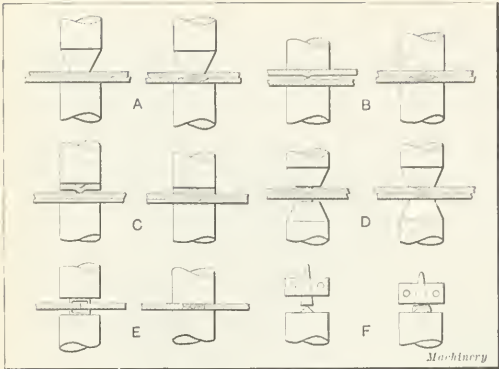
Diagram illustrating Various Processes of Electric Welding accomplished on Electric Spot-welding Machines
